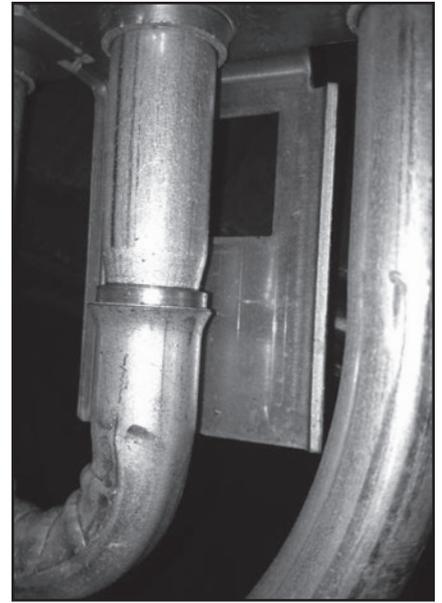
View of the customer's brazed aluminum heat exchanger.
